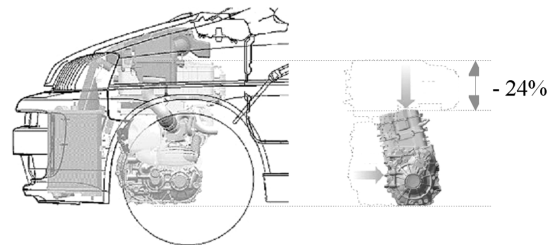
Package layout of FCX-Clarity in Honda Motor Co.
